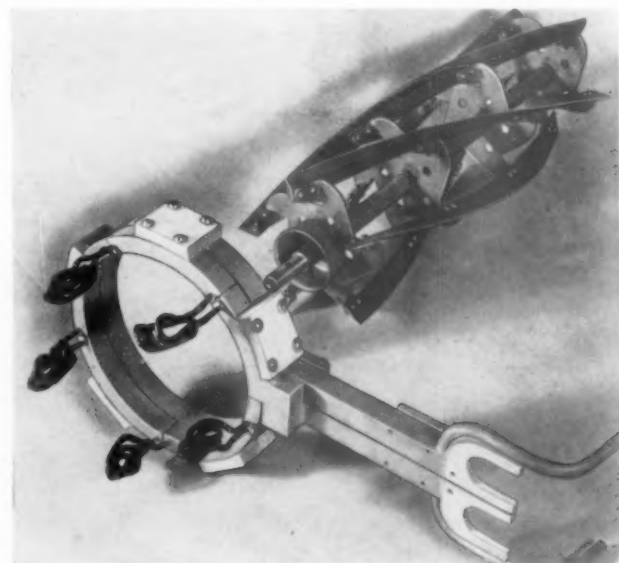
A lawnmower head assembly on which the blades are hardened simultaneously after being mounted to the spiders.
